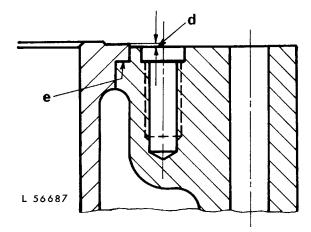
Upper Fit and Sealing Face of Cylinder Liner in Cylinder Block
